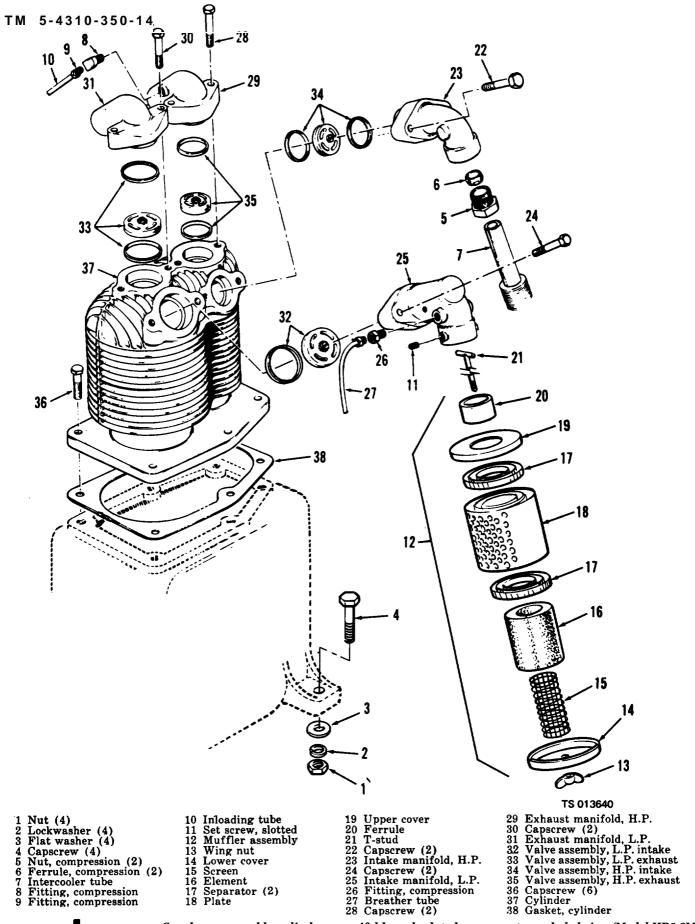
Crankcase assembly, cylinders, manifolds and related components, exploded view (Model HR5-8M-4).
